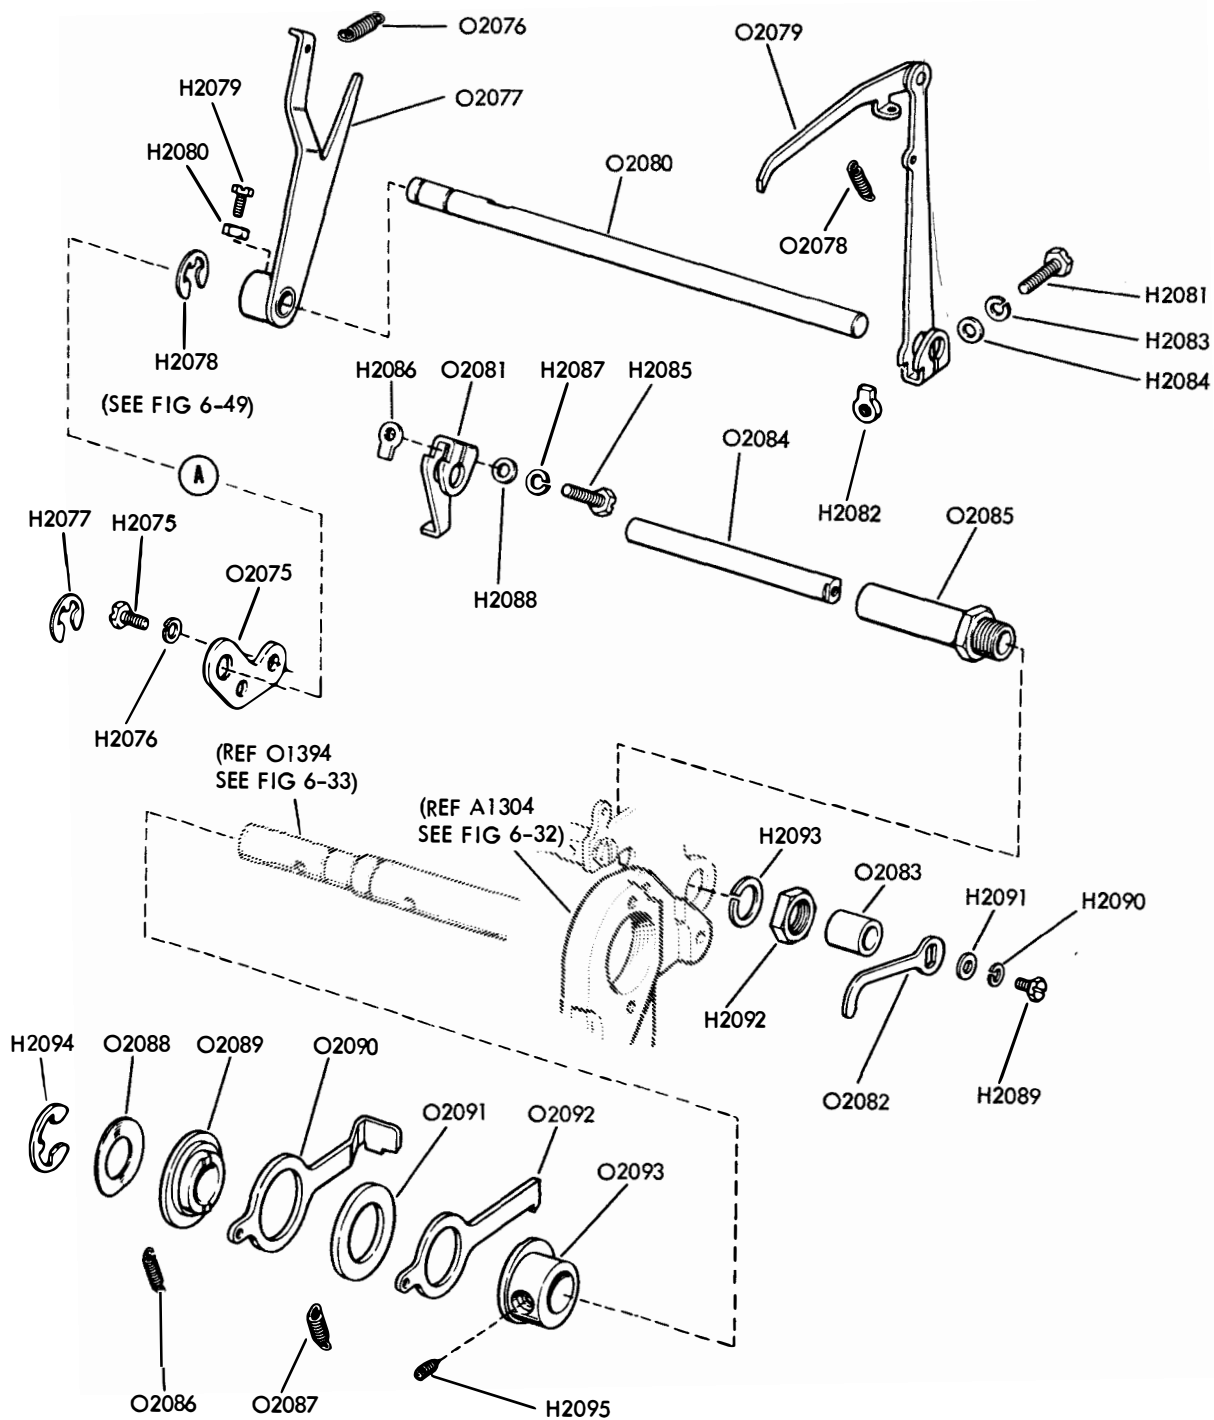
Typing Reperforator, Non-Interfering Blank Tape Feed-Out Mechanism
